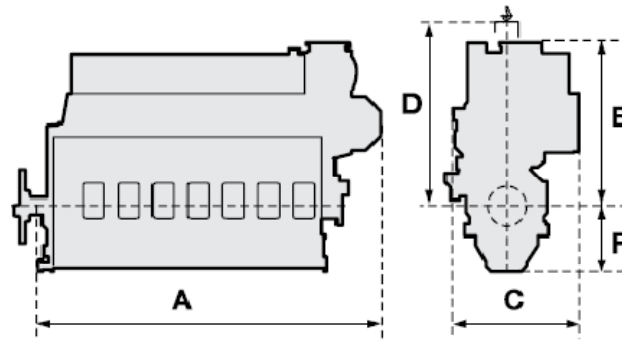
L50DF engine drawing [Wärtsilä Ship Power Technology (2009a)]
